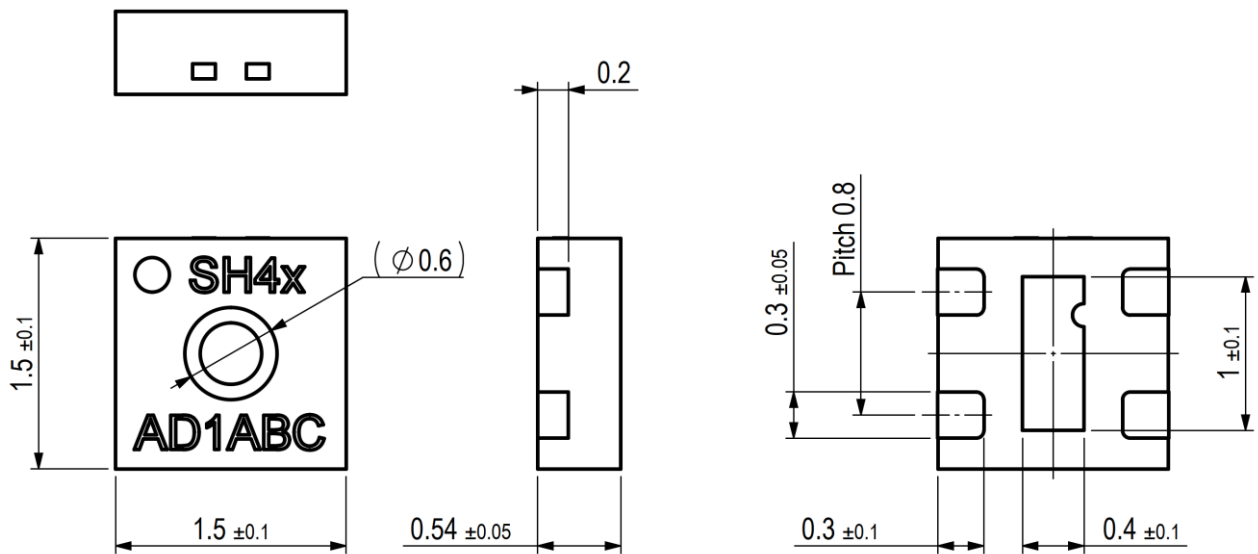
Dimensional drawing of SHT4x including package tolerances (units mm).
